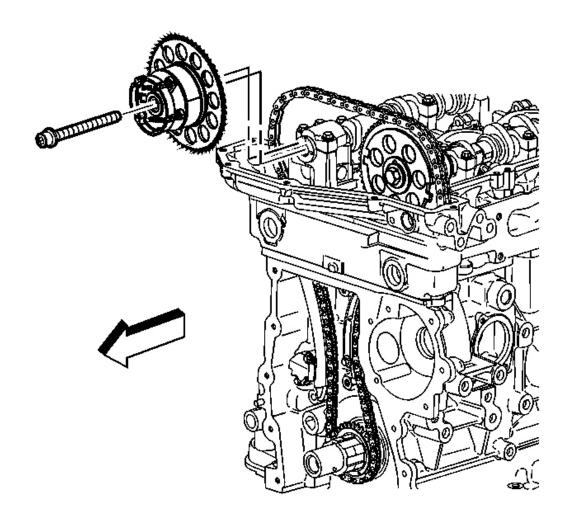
Identifying Exhaust Camshaft Position Actuator Bolt Courtesy of GENERAL MOTORS CORP.
